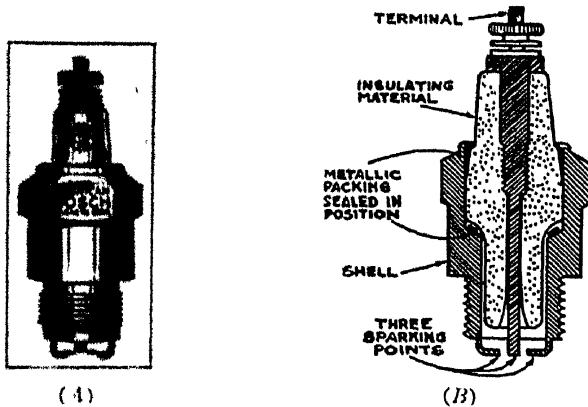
(A) The Bosh spark plug (B) Sectional view showing insulator sealed permanently in place
